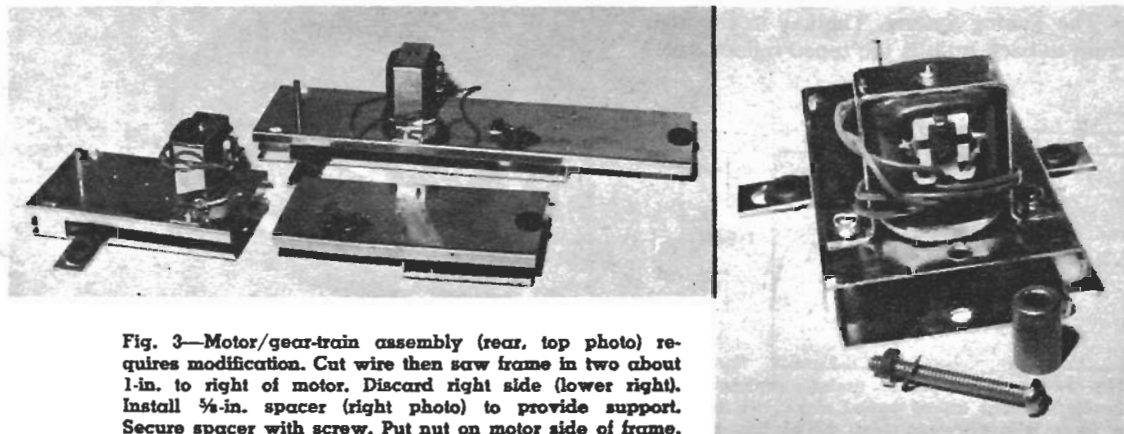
Motor/gear-train assembly (rear, top photo) requires modification. Cut wire then saw frame in two about 1-in. to right of motor. Discard right side (lower right). Install ¼-in. spacer (right photo) to provide support. Secure spacer with screw. Put nut on motor side of frame.
